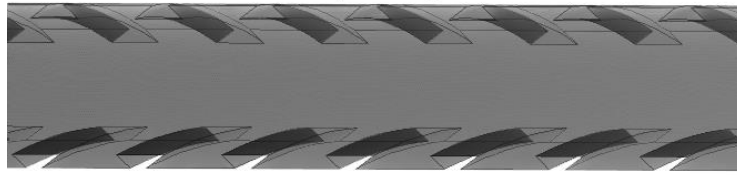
The 3D geometry design of parallel rib P45-Z45 configuration inside the blade
